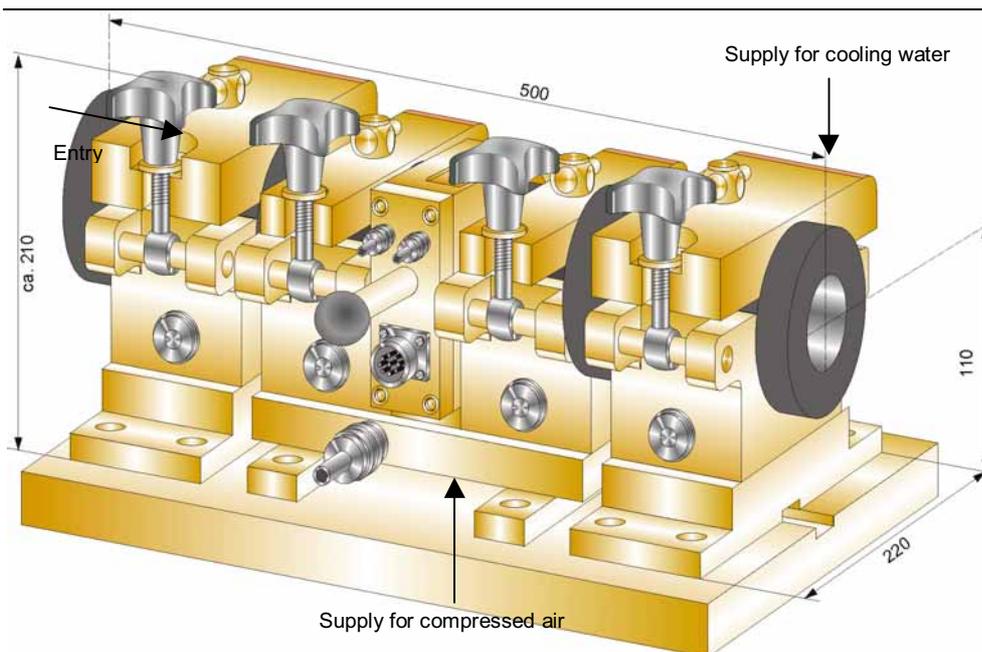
Coil carrier with two optional nozzle guide units, optional mounting plate
